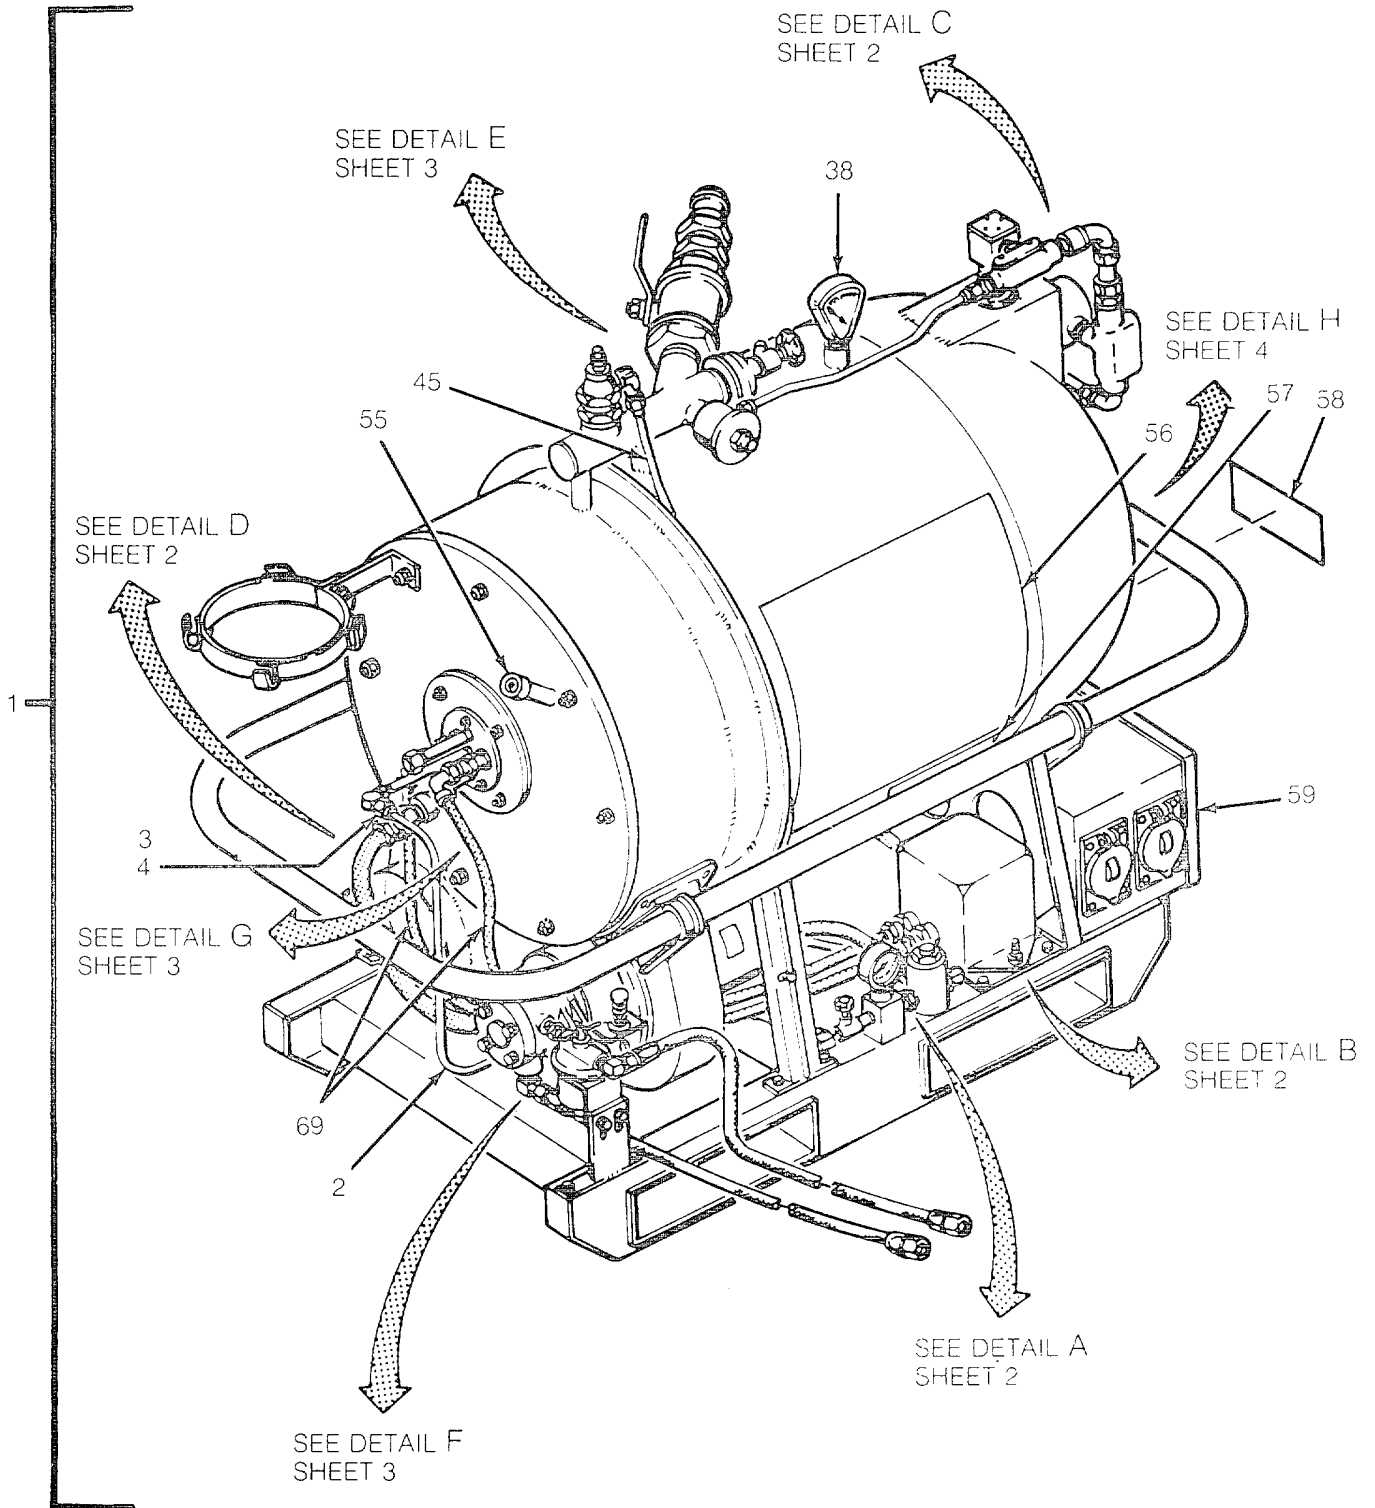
Water Heater Assembly (Sheet 1 of 4)
